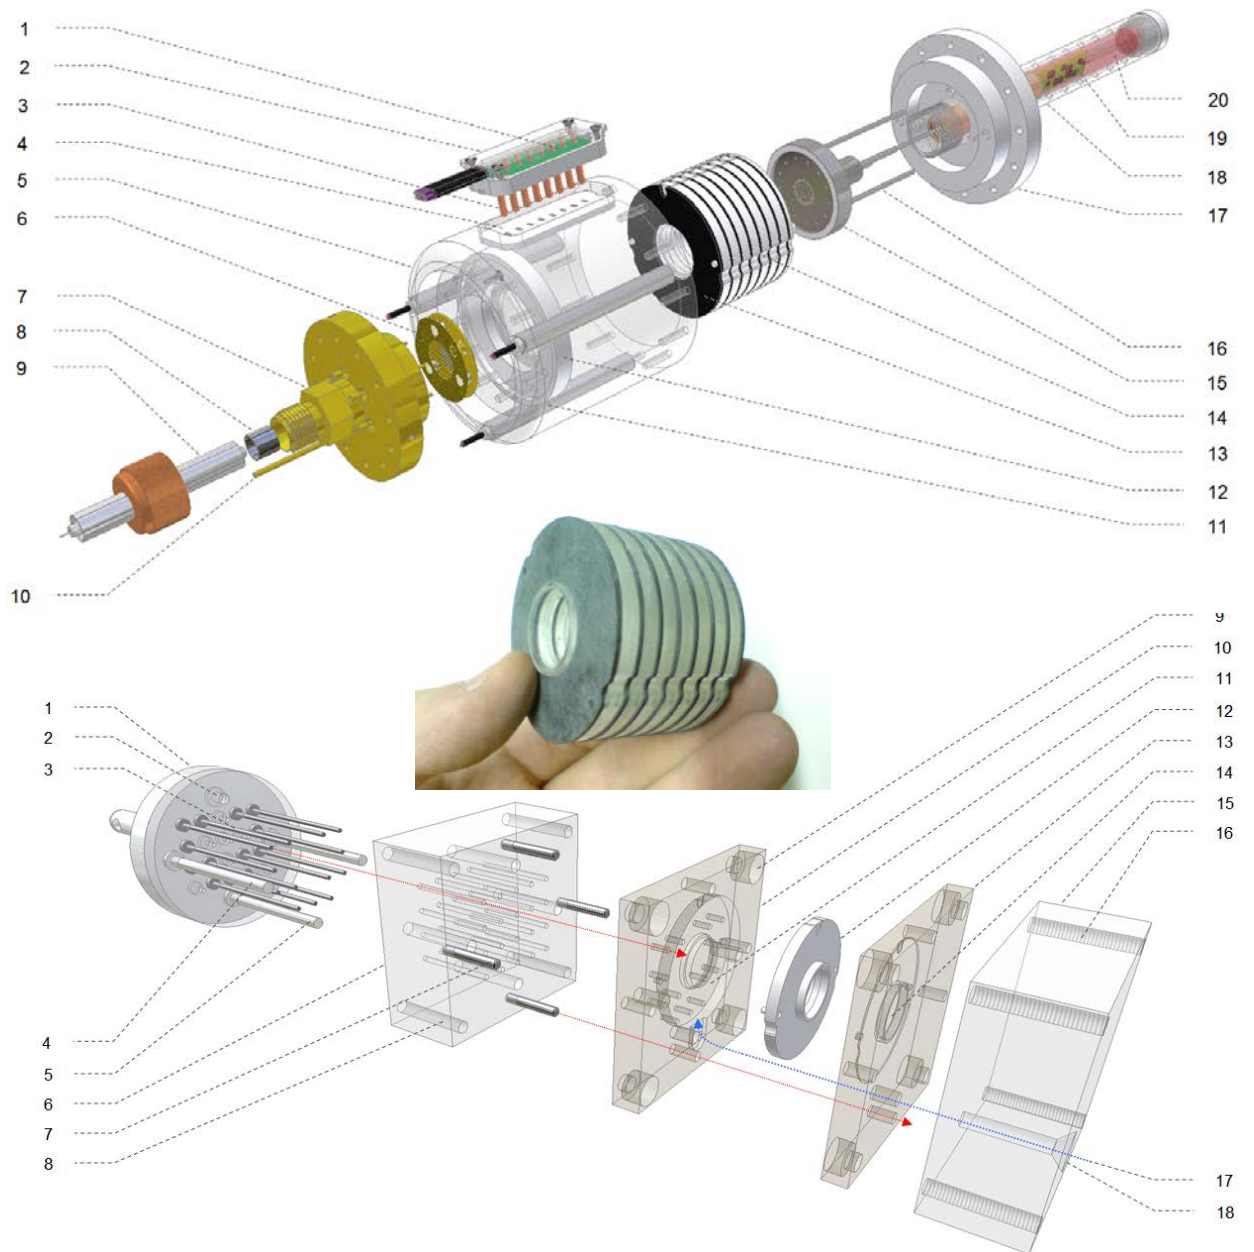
Exploded diagrams of: the ion mobility spectrometer assembly (Top); the injection molding tool assembly, for the encapsulating insulator (Bottom); and, a photograph showing the assembled drift tube (Middle).
